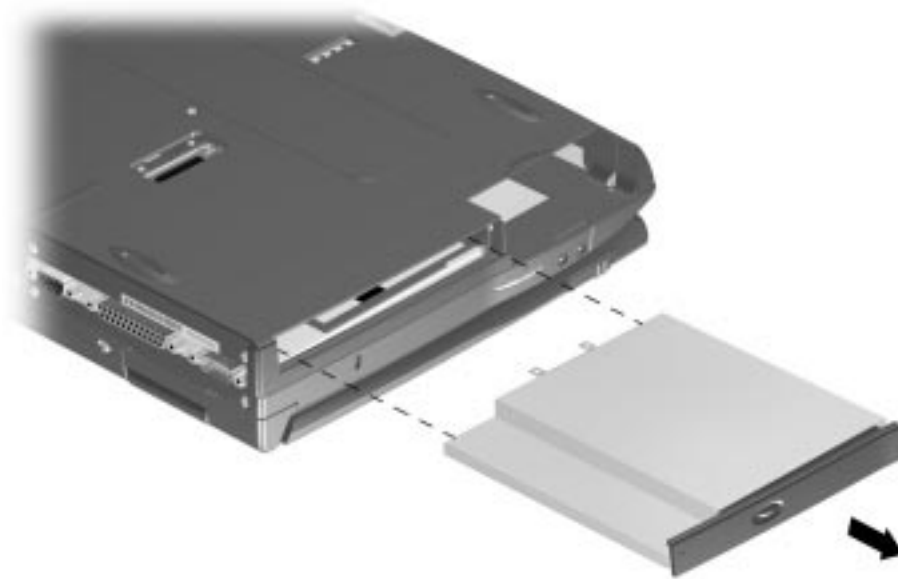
Removing the CD-ROM or DVD-ROM Drive
